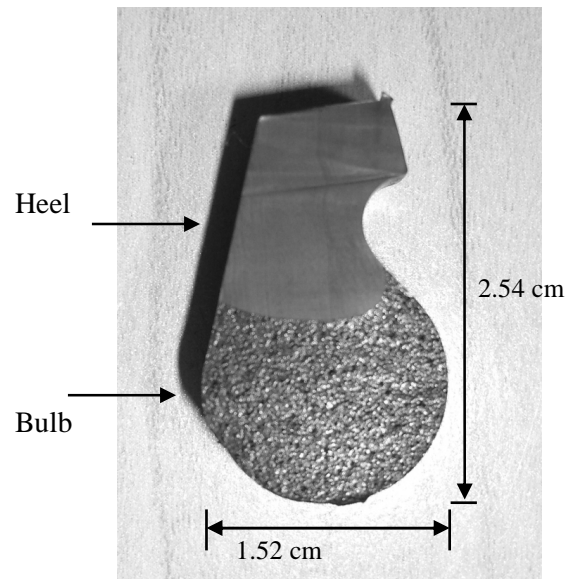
Cross-section view of a 10 cm (4-inch) SBR gasket showing heel and bulb portion and various dimensions
